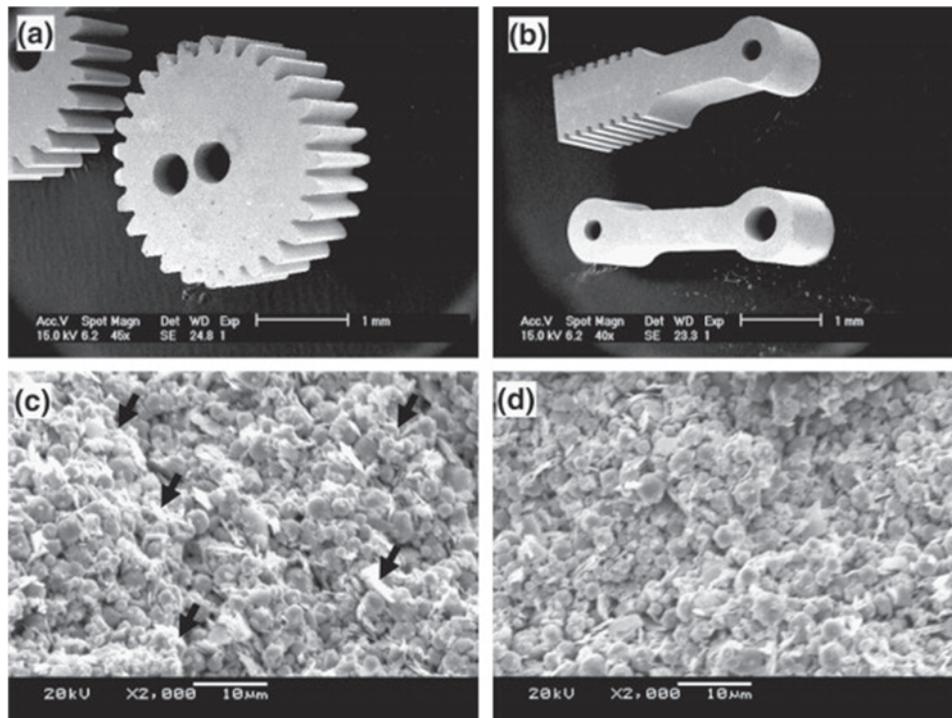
Composite micro parts: (a) micro gears; (b) micro pistons. Fractured surface of 10% alumina composite: (c) dispersed powders together; (d) powders dispersed separately. Reprinted with permission from [40] M. F. Imbady and K. Jiang, Fabrication of free standing 316-L stainless steel– Al_2O_3 composite micro machine parts by soft molding. *Acta Materialia* 57, 4751 (2009). © 2009, Elsevier.
